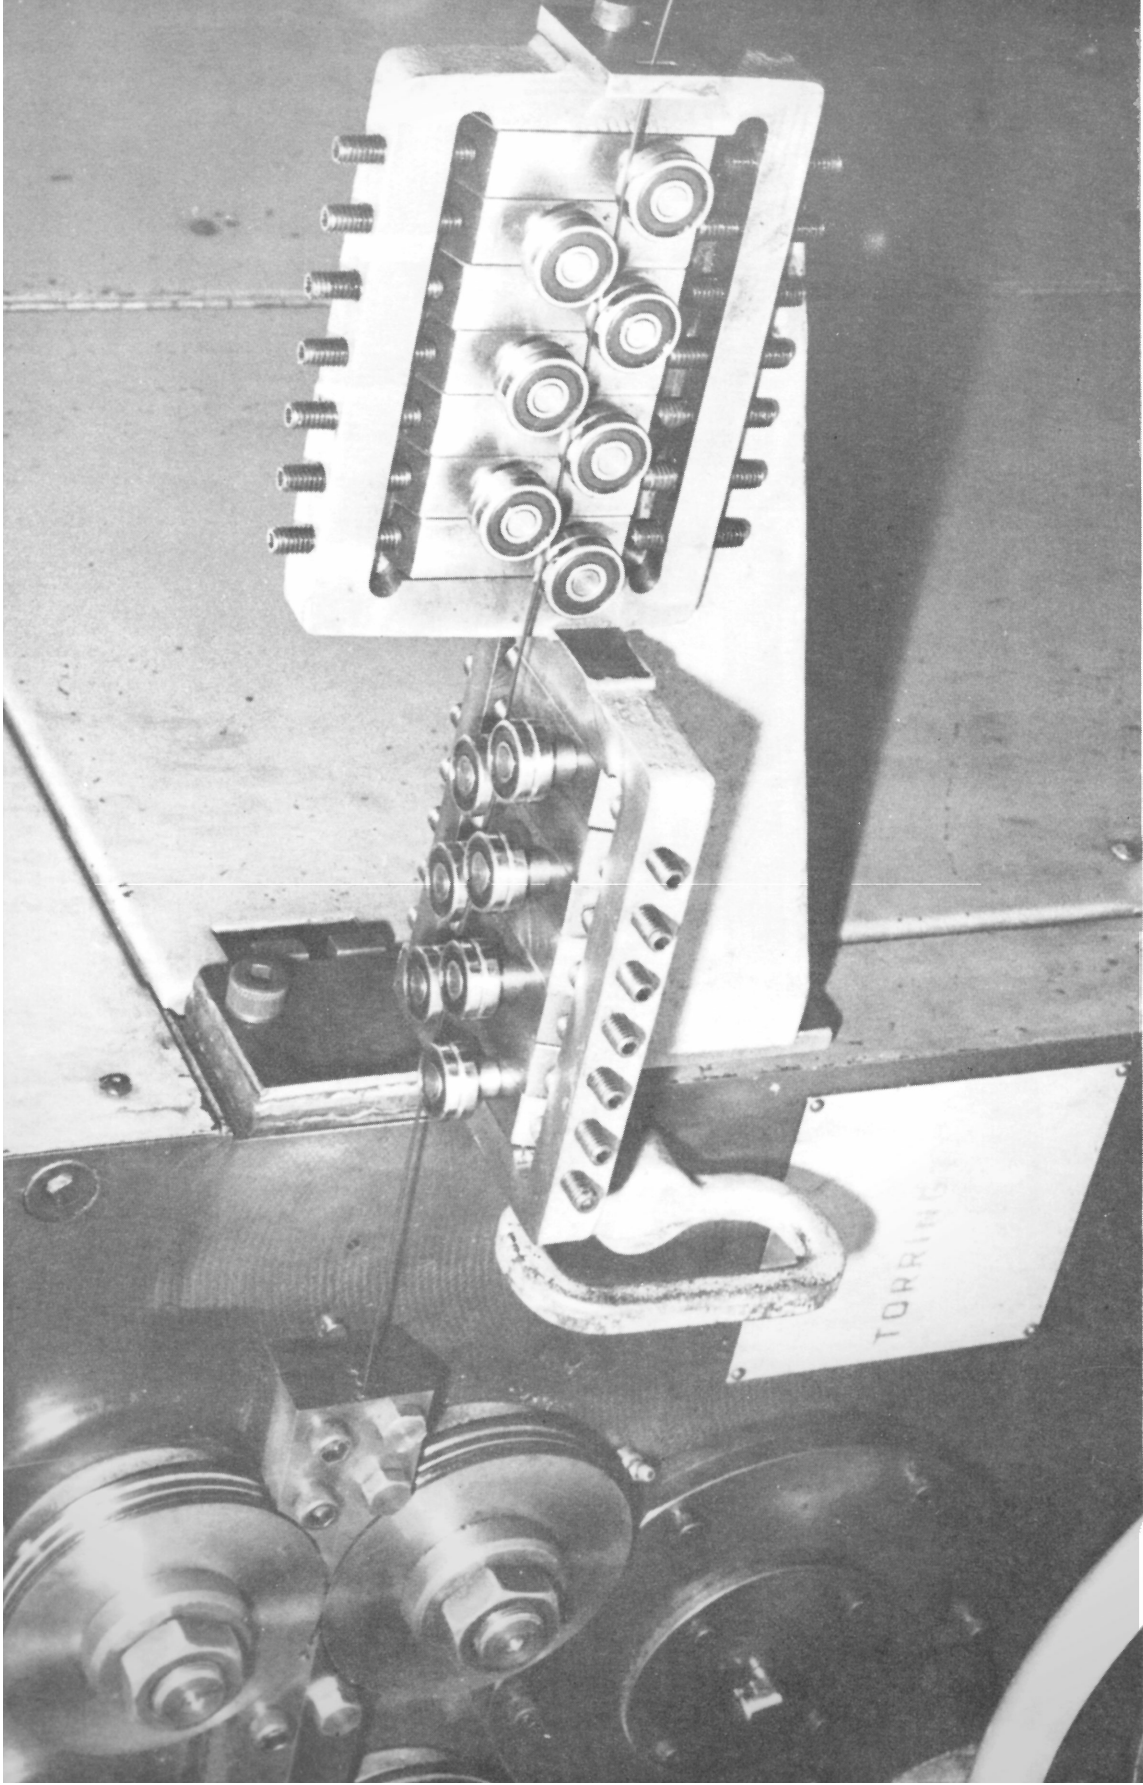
ROLLER STRAIGHTENING ATTACHMENT
